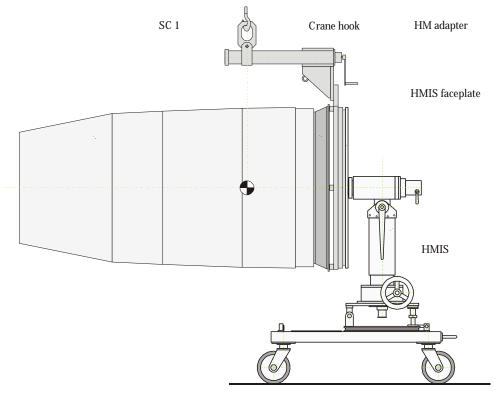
Transfer of spacecraft 1 with adapter to HMIS by crane
